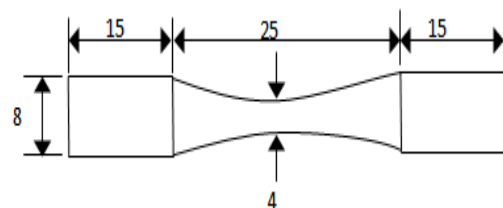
Fatigue Test Specimen (All dimensions in mm)
